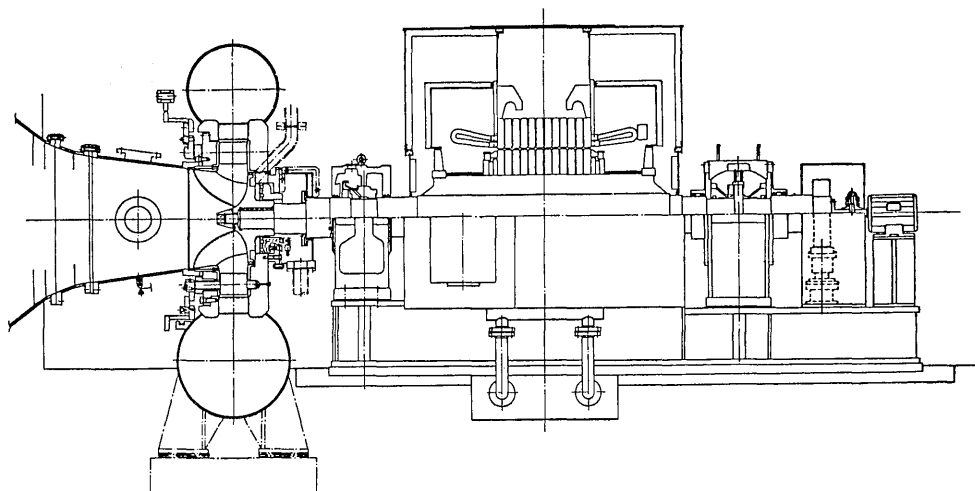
Sectional drawing of horizontal Francis turbine and generator
